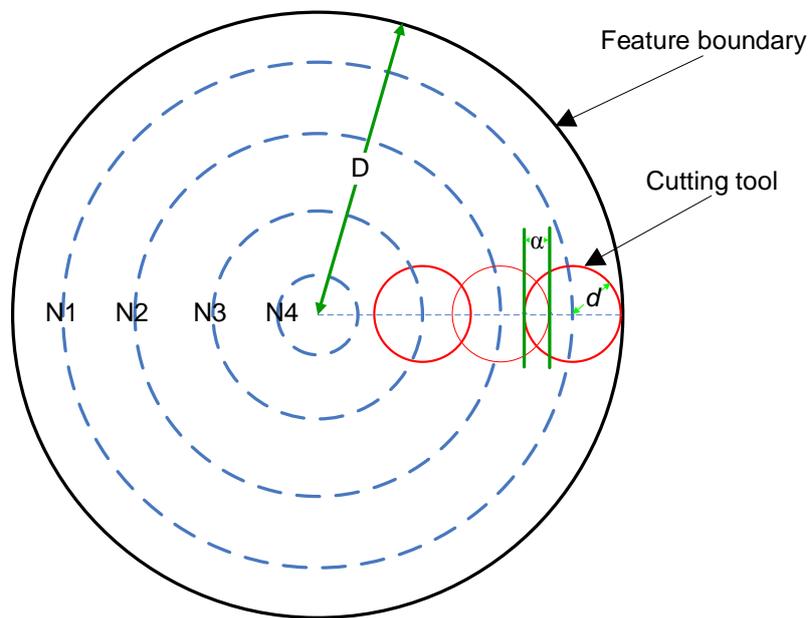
Cutting tool path for machining of a cylindrical pocket
